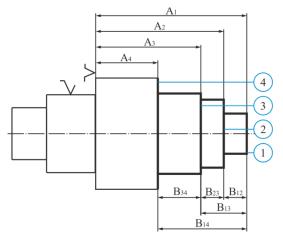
Dimensioning of a stepped shaft for processing parts on a CNC lathe $(A_1 = 31^{+0,1}; A_2 = 26^{+0,1}; A_3 = 22^{+0,1}; A_4 = 13^{+0,1})$.
